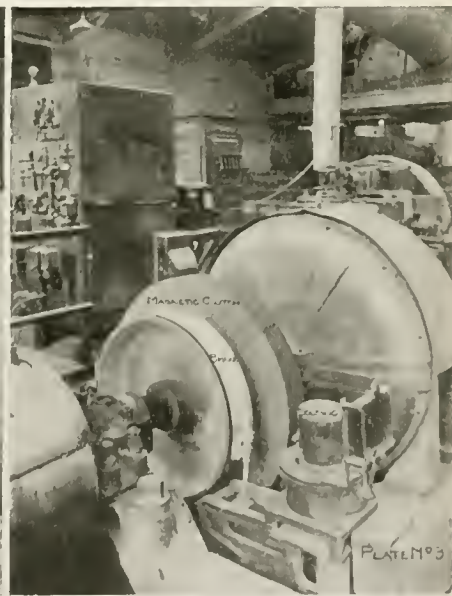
THE BRAKE ON THE MAGNETIC CLUTCH SHOULD BE OPERATED BY A COUNTERWEIGHT
